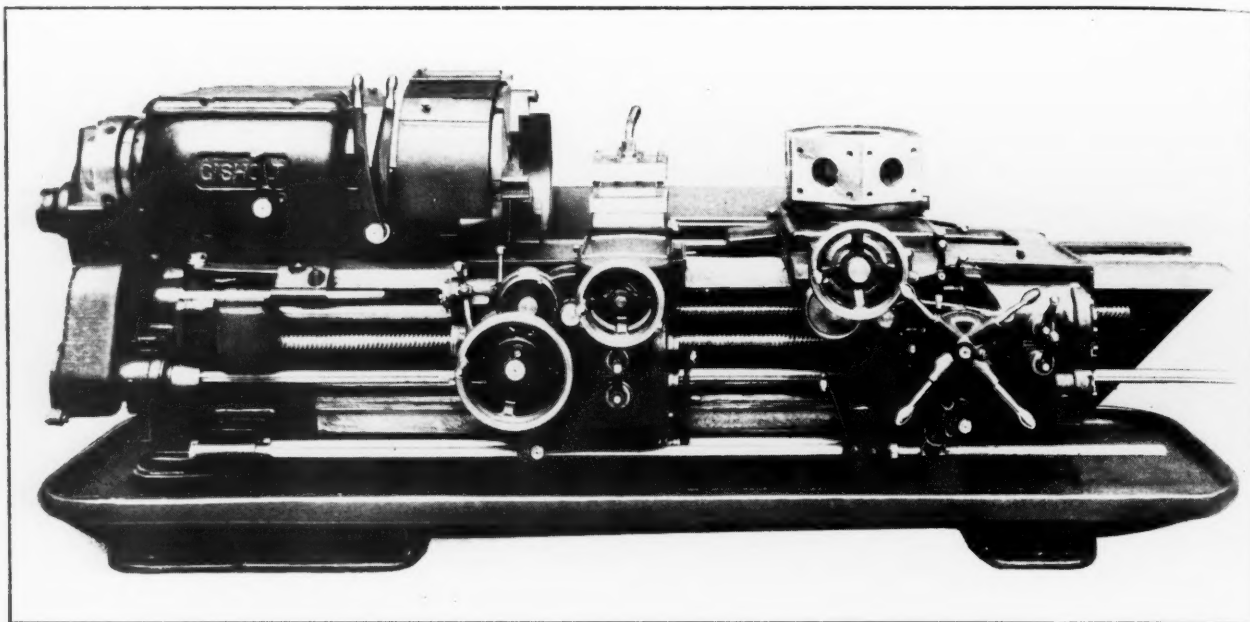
Turret Lathe of the 3L Size equipped with a Cross-feeding Turret
